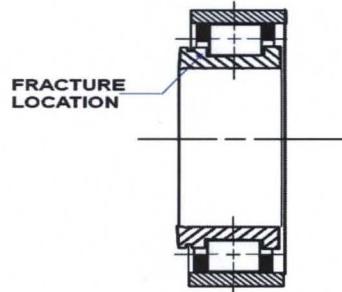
Roller Bearing Inner Race Fracture Location
